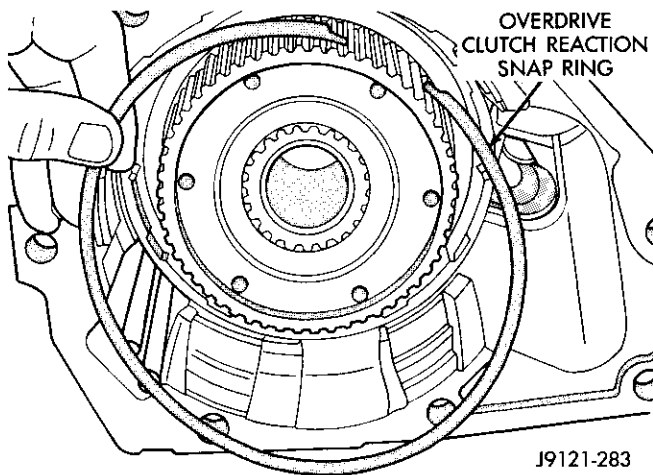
Removing Overdrive Clutch Reaction Snap Ring
